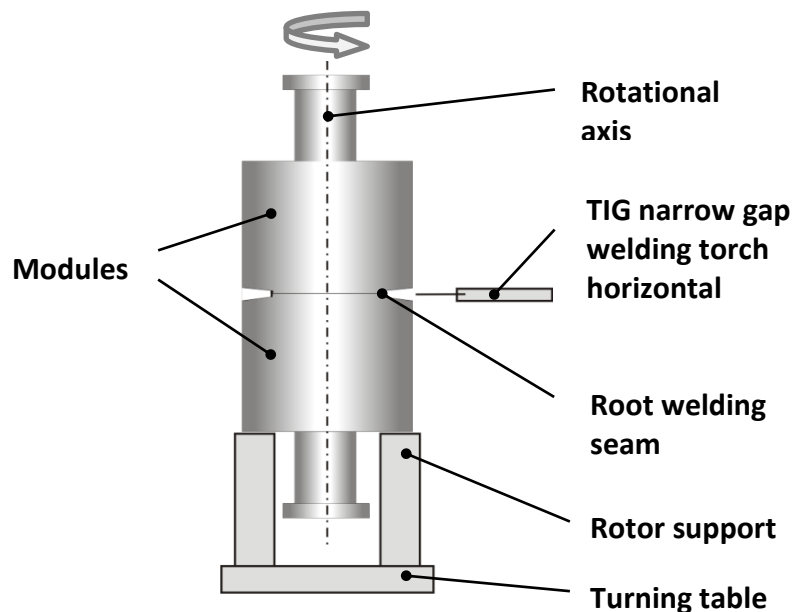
Root welding scheme – V-H/TIG-SAW
